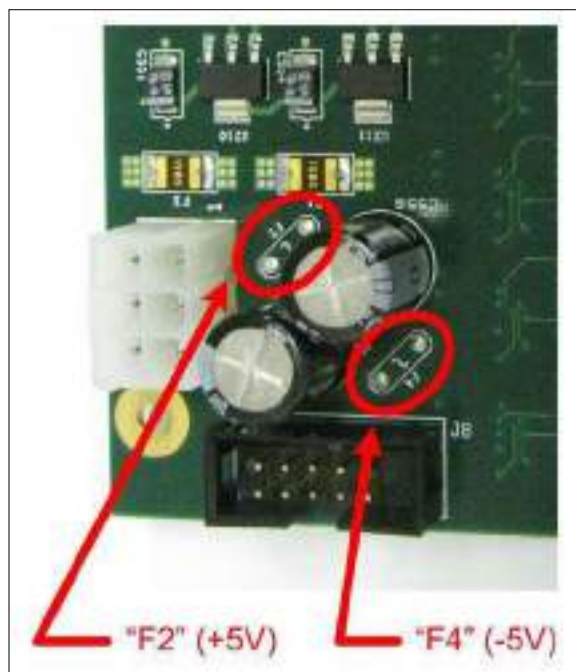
Close-Up of LXDA 2.0 +5V & -5V Test Points
